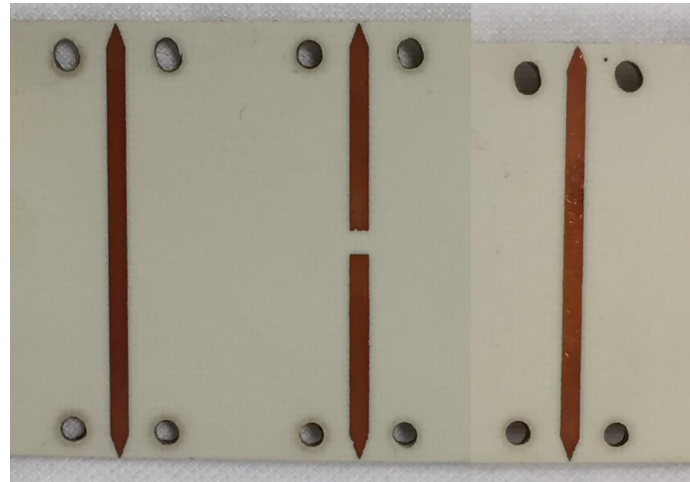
The photo of the (a) die with inkjet printed package and (b) die with traditional package.
